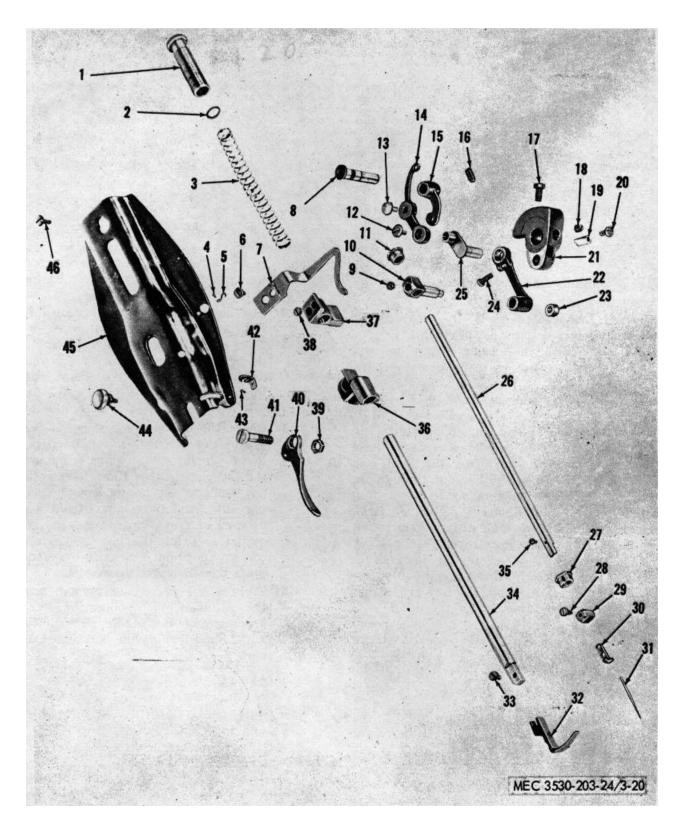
Clothing sewing machine face plate and needle and presser bars.
